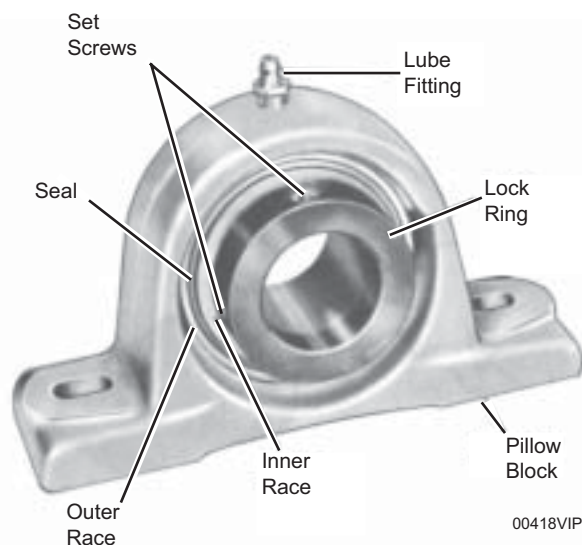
BEARING WITH SETSCREW TYPE LOCKING DEVICE
